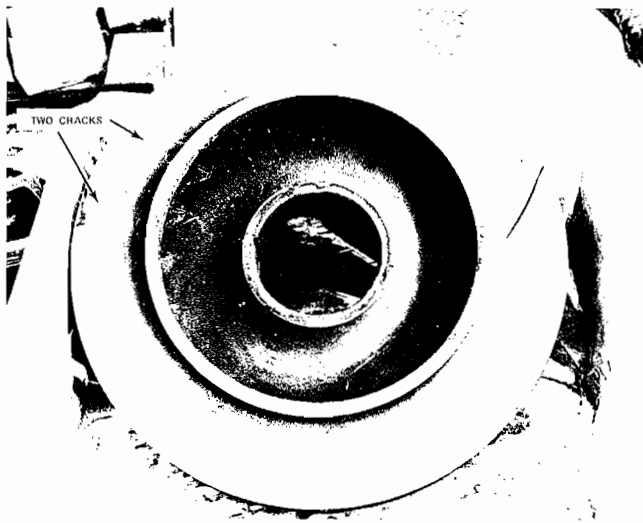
Condition of First Stage Impeller During Inspection, After Eight Month Service.
